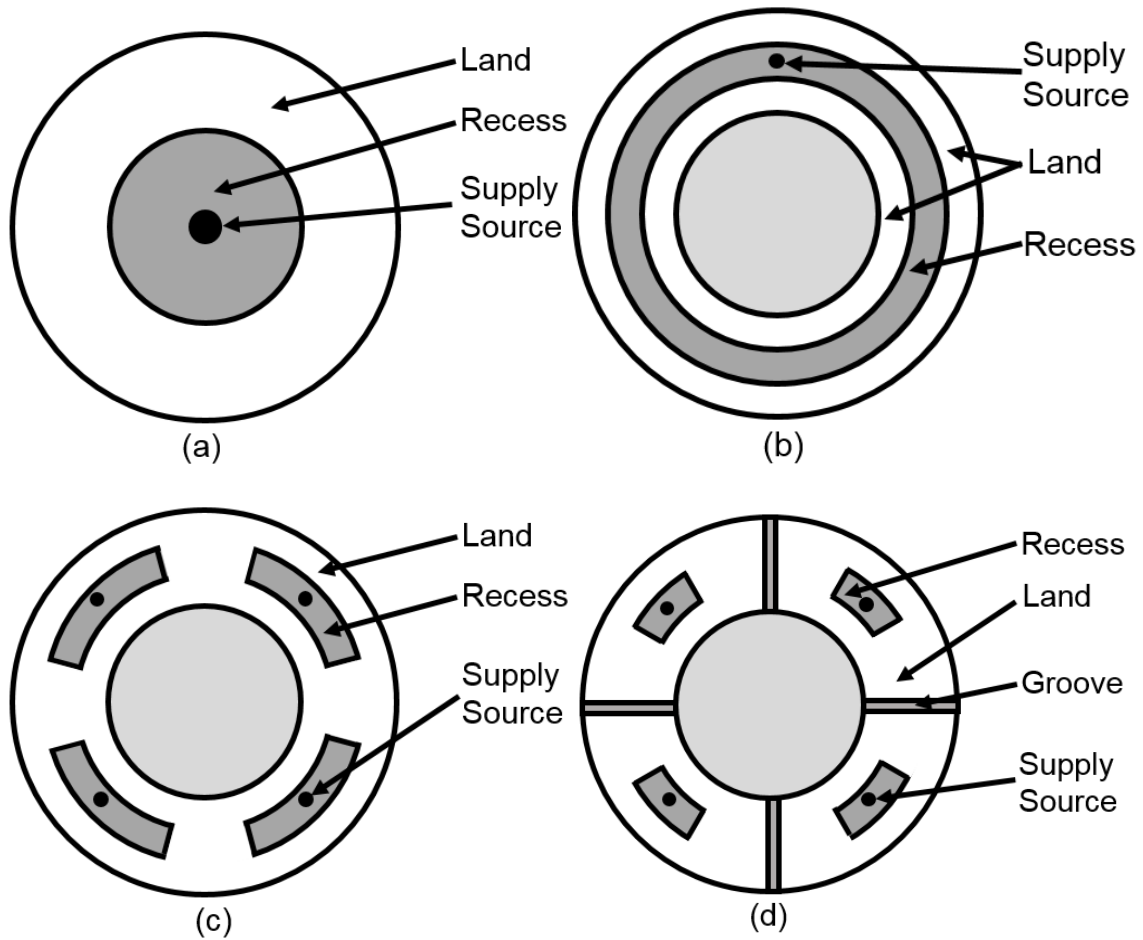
Common recess geometries in HTBs, including: (a) single circular recess thrust bearing, (b) annular groove thrust bearing, (c) annular multi-recess thrust bearing, and (d) multi-pad thrust bearing.
